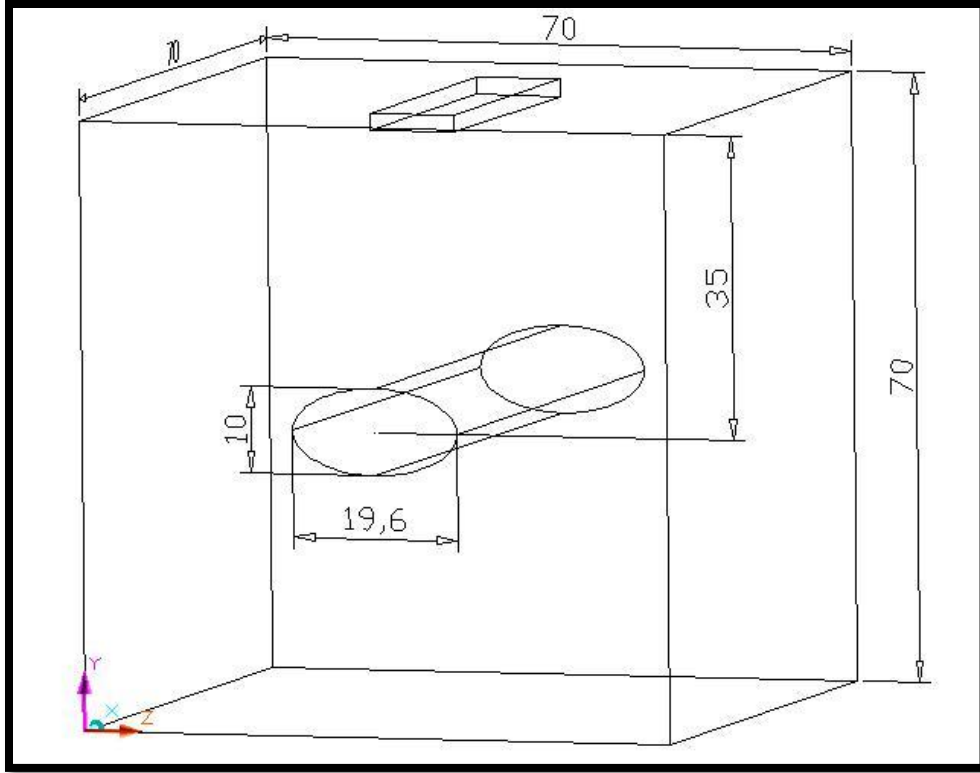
3D view for Dimension of Ellipse Horizontal shape cross-sectional cooling channels
